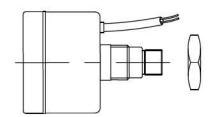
CONTACTED PRESSURE GAUGE ASSEMBLY (300 BAR SYSTEM)
